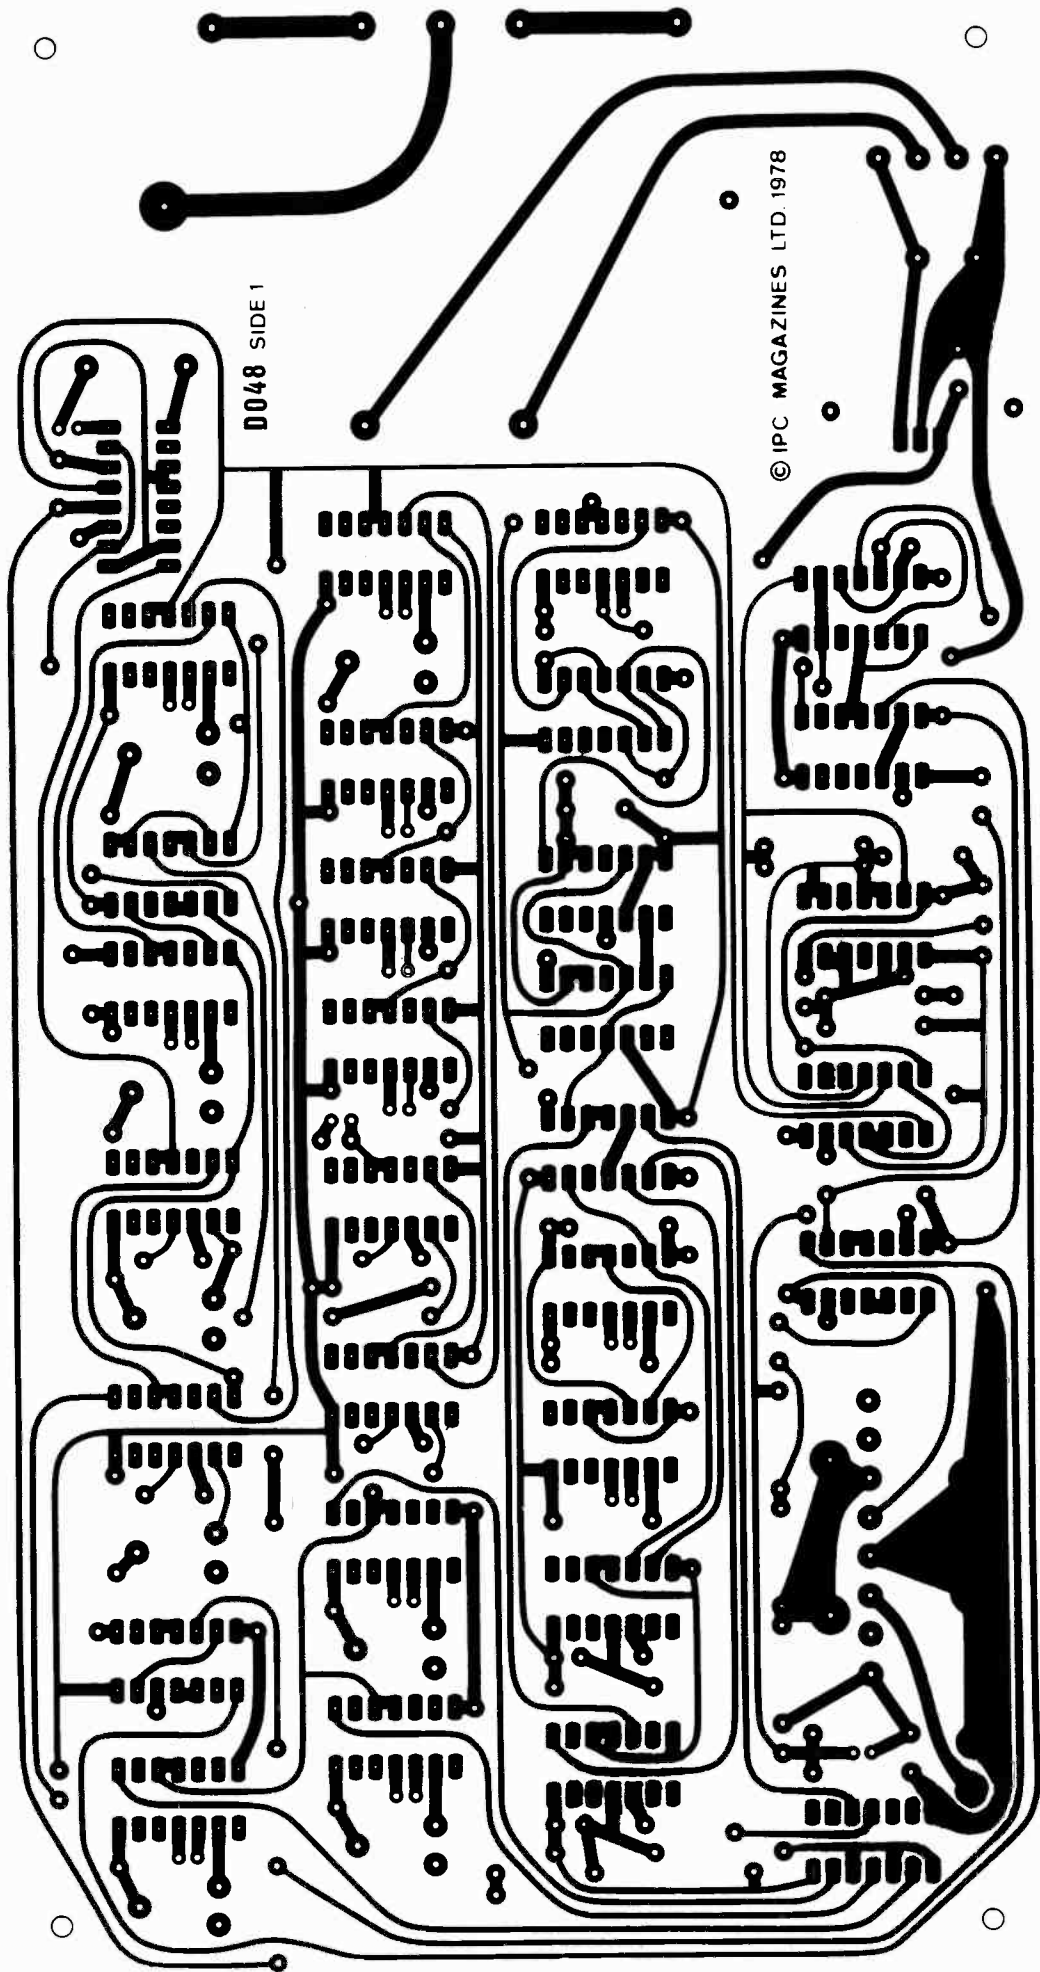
Underside print pattern. Note that this is a double sided p.c.b. The top side will be shown next month. Scale 1:1.
